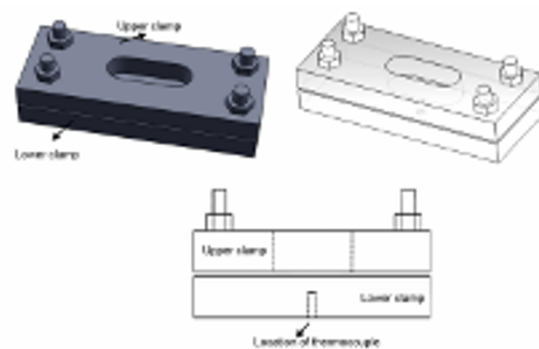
A schematic illustration of the specimen fixture and location of thermocouple.
